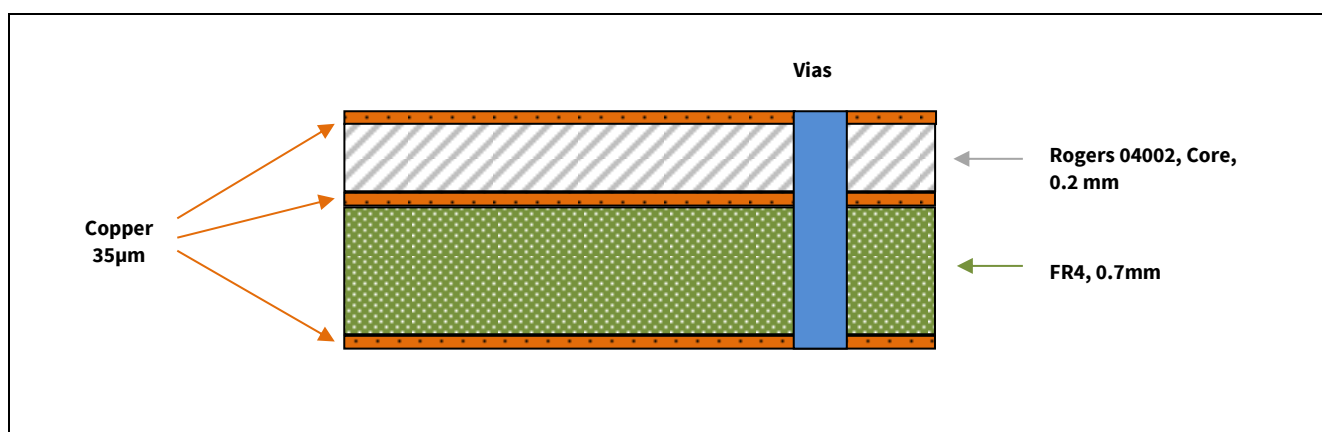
PCB cross-section of the evaluation board for BGS12PN10
